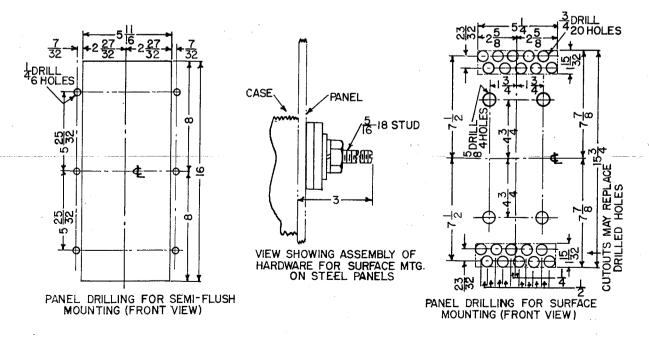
Outline and Panel Drilling Dimensions for Type CEXI7D Relay
